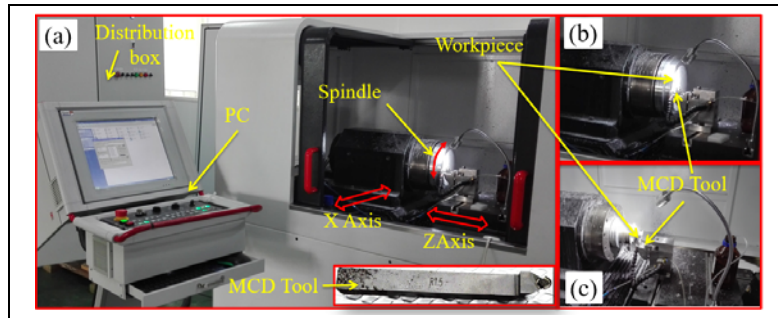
Ultra-precision machining tool and turning process: (a) structural layout, (b) workpiece fixed on a vacuum chuck, (c) workpiece fixed on a three-jaw chuck.
